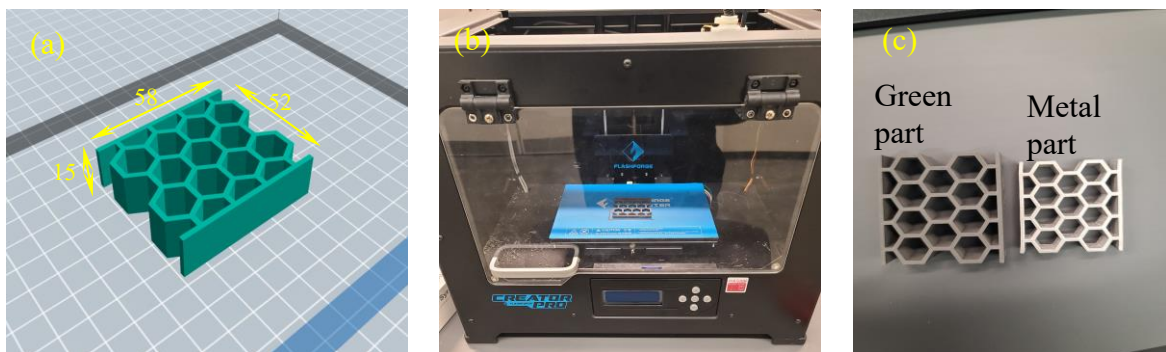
Honeycomb structure design and 3D printing for metal part (unit: mm)
